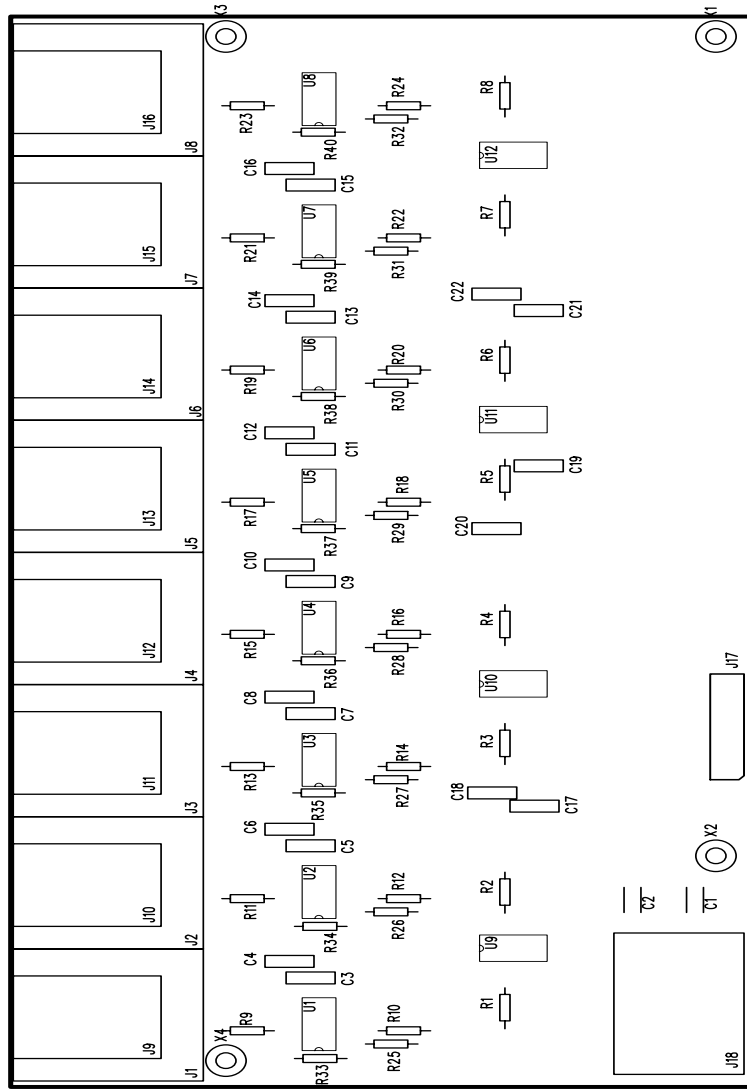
Audio output module PCB, silkscreen/assembly drawing.
